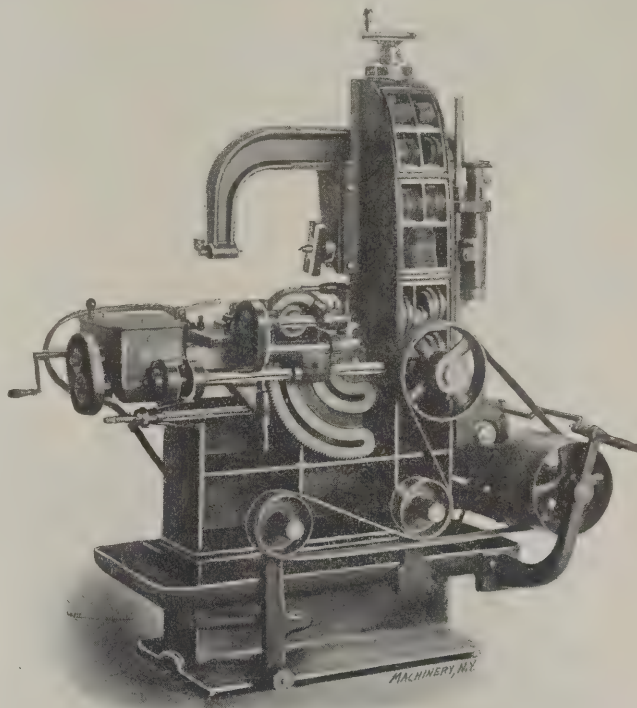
Rear of Machine, showing Provisions for Cutting Bevel Gears.
